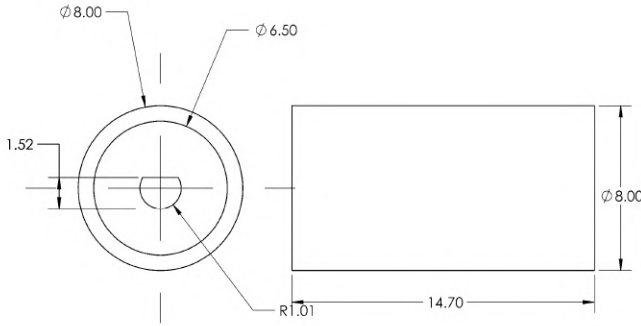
CAD rendering of precision resin wheel with hollow inside geometry.
